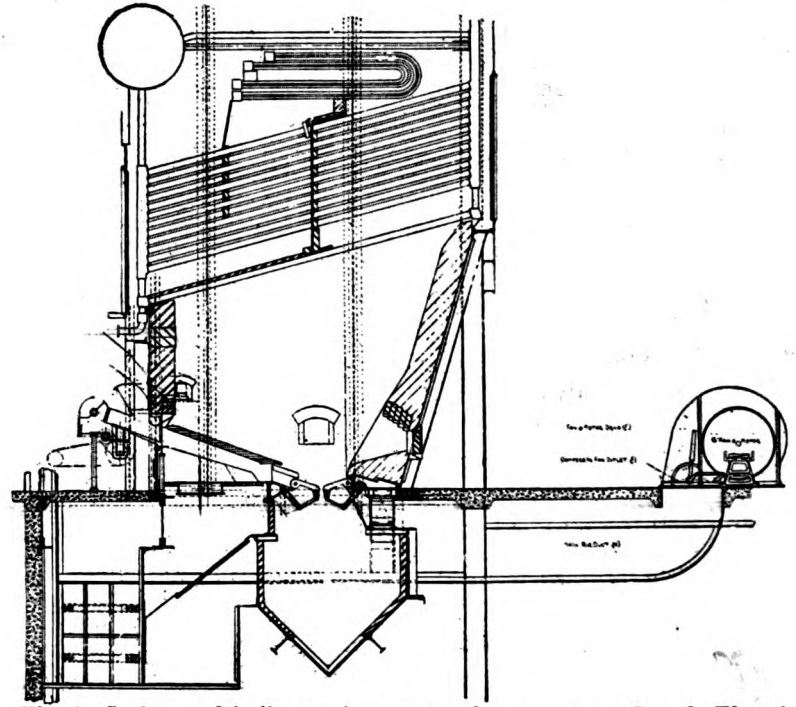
Stoker and boiler equipment at the American Gas & Electric Co. plant.
